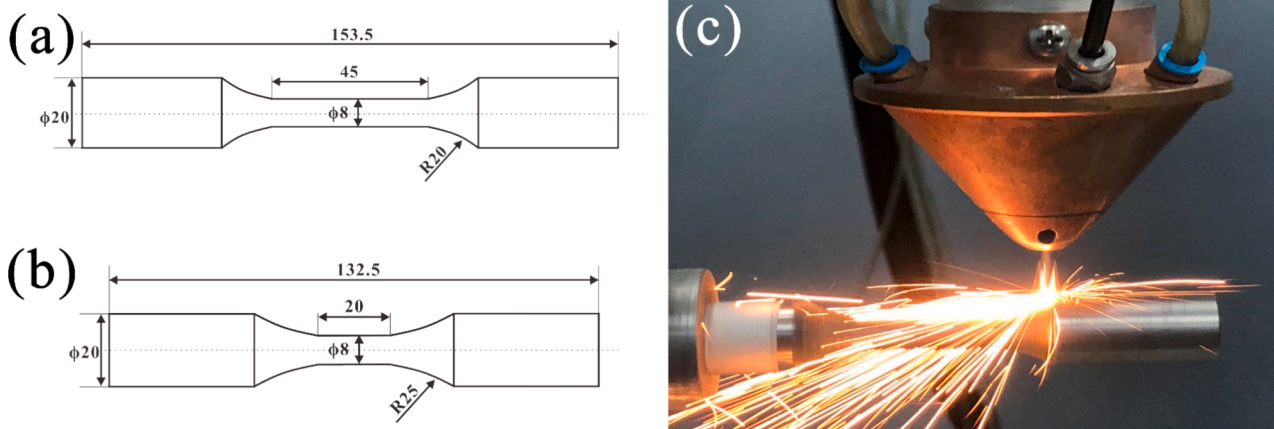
(a) Tensile specimen dimensions in mm; (b) Fatigue specimen dimensions in mm; (c) Photograph of the Inconel 625 coating deposition on rotating Q235 steel.
